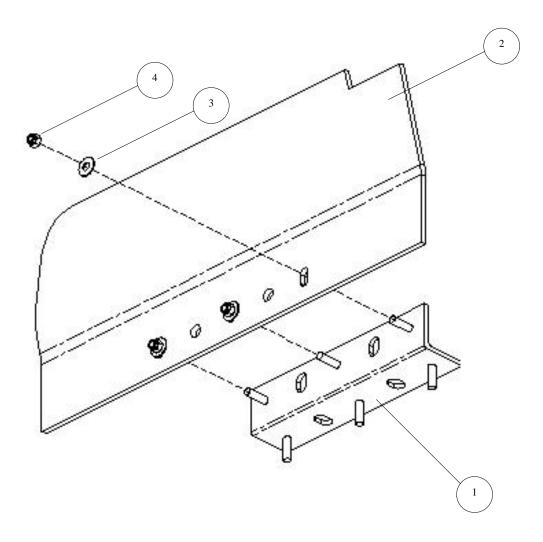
Lower Wheel Well Panel Pre-Assembly.
